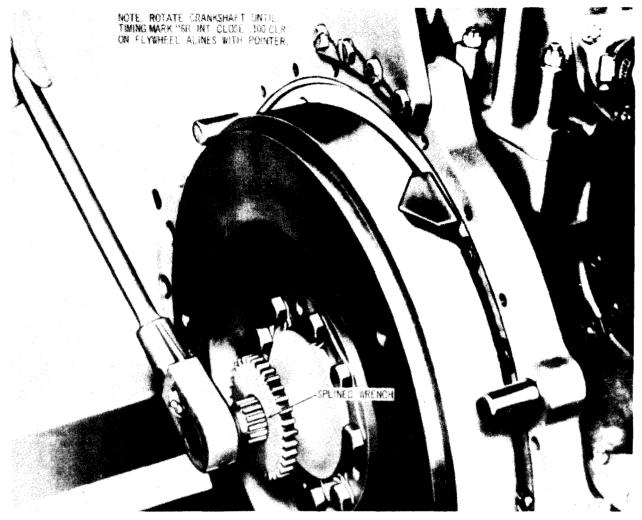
Positioning engine flywheel, model AVDS-1790-2C and AVDS-1790-2D engines.
